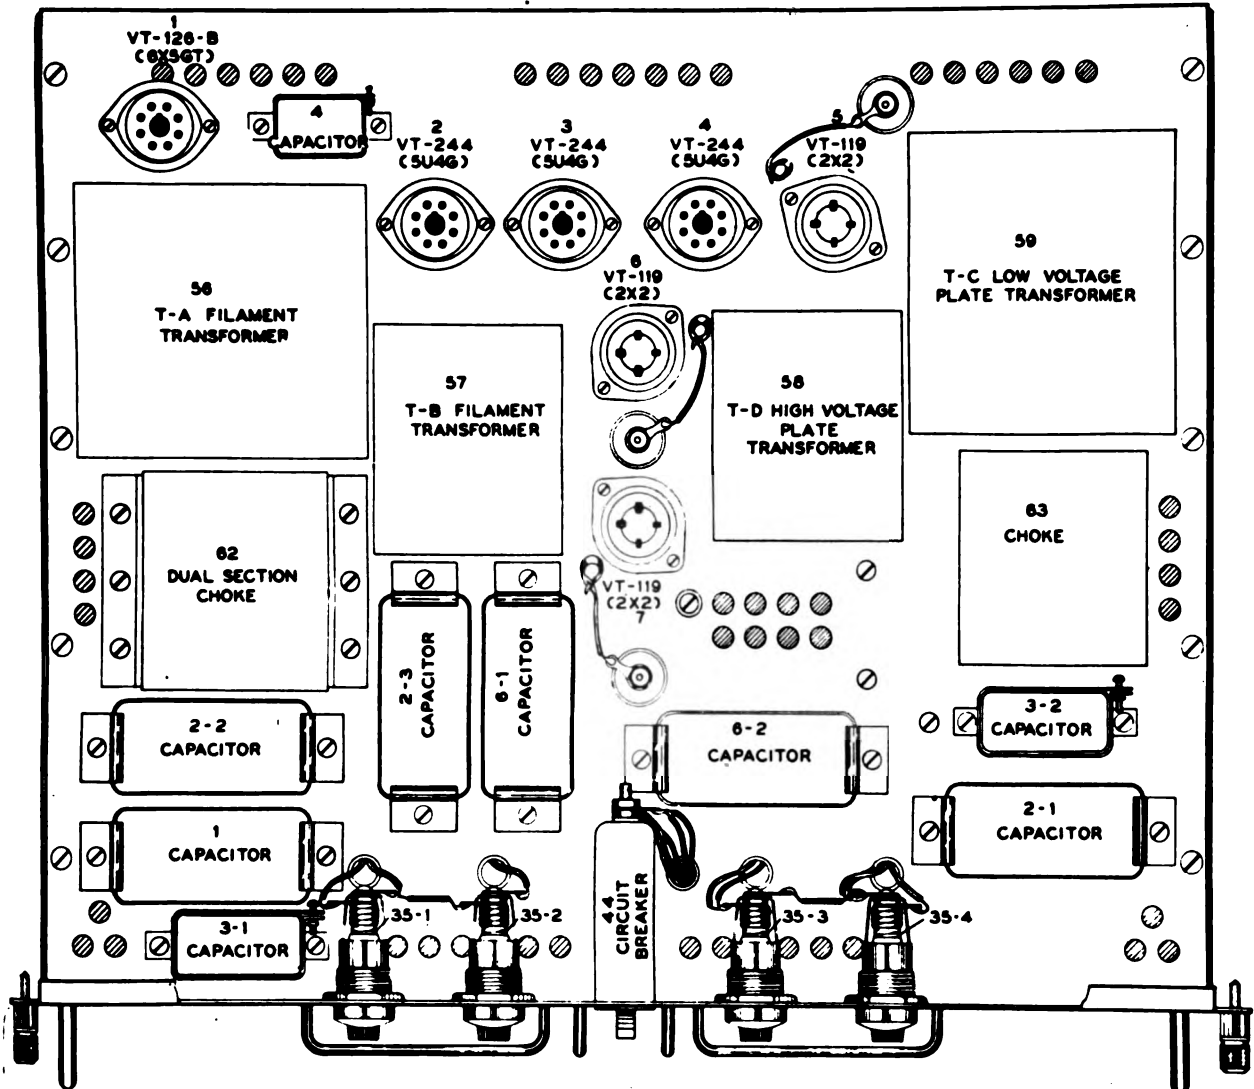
Power Supply RA-105-A, top view showing location of parts.
